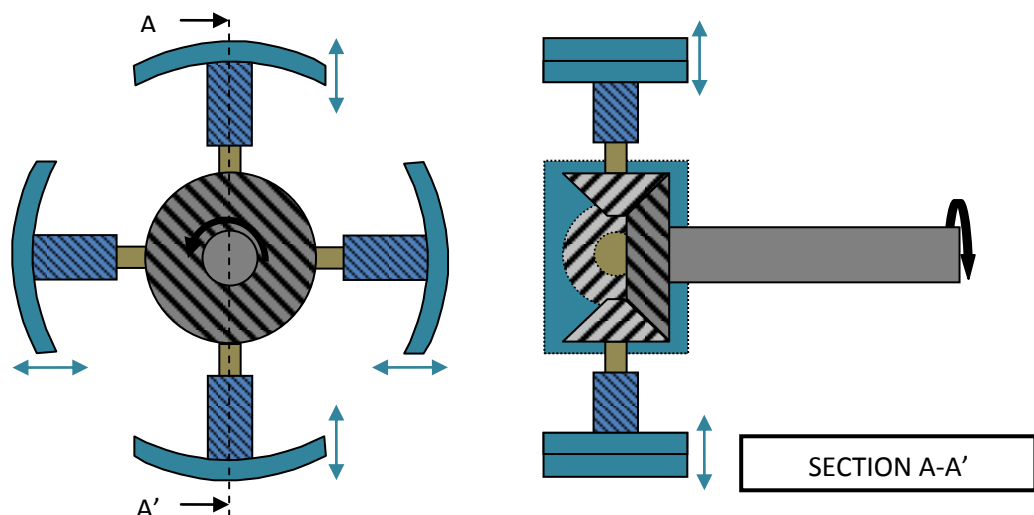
'bevel gear'- hollow internal workpiece support system.
